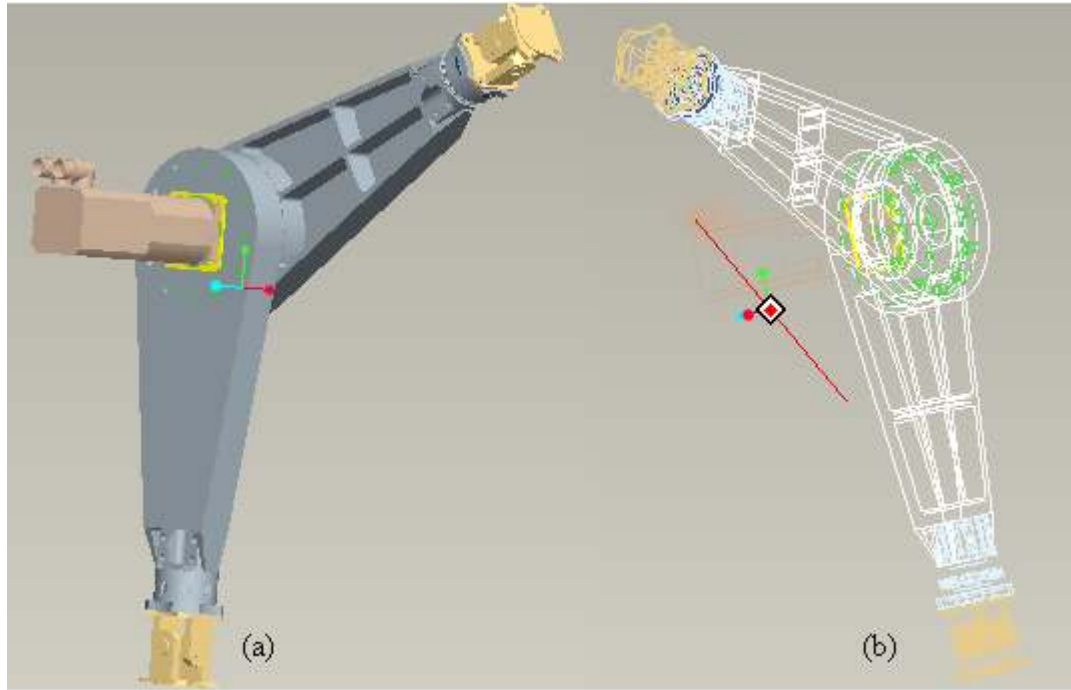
Pro Engineer drawing of a leg: (a) Shading view. (b) Wireframe view.
